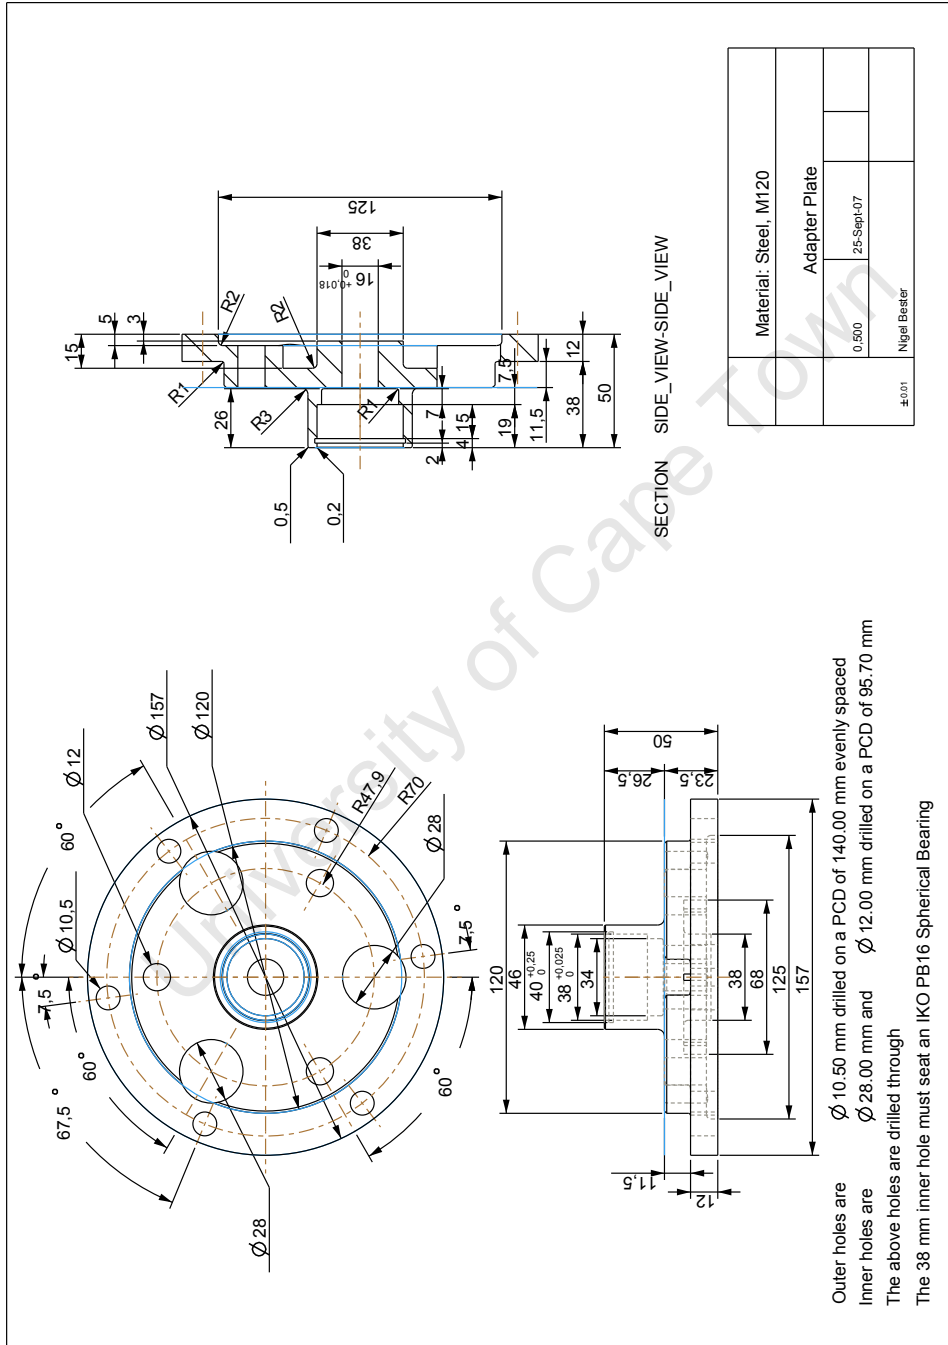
Dyno-shaft adapter plate manufacturing drawing.
